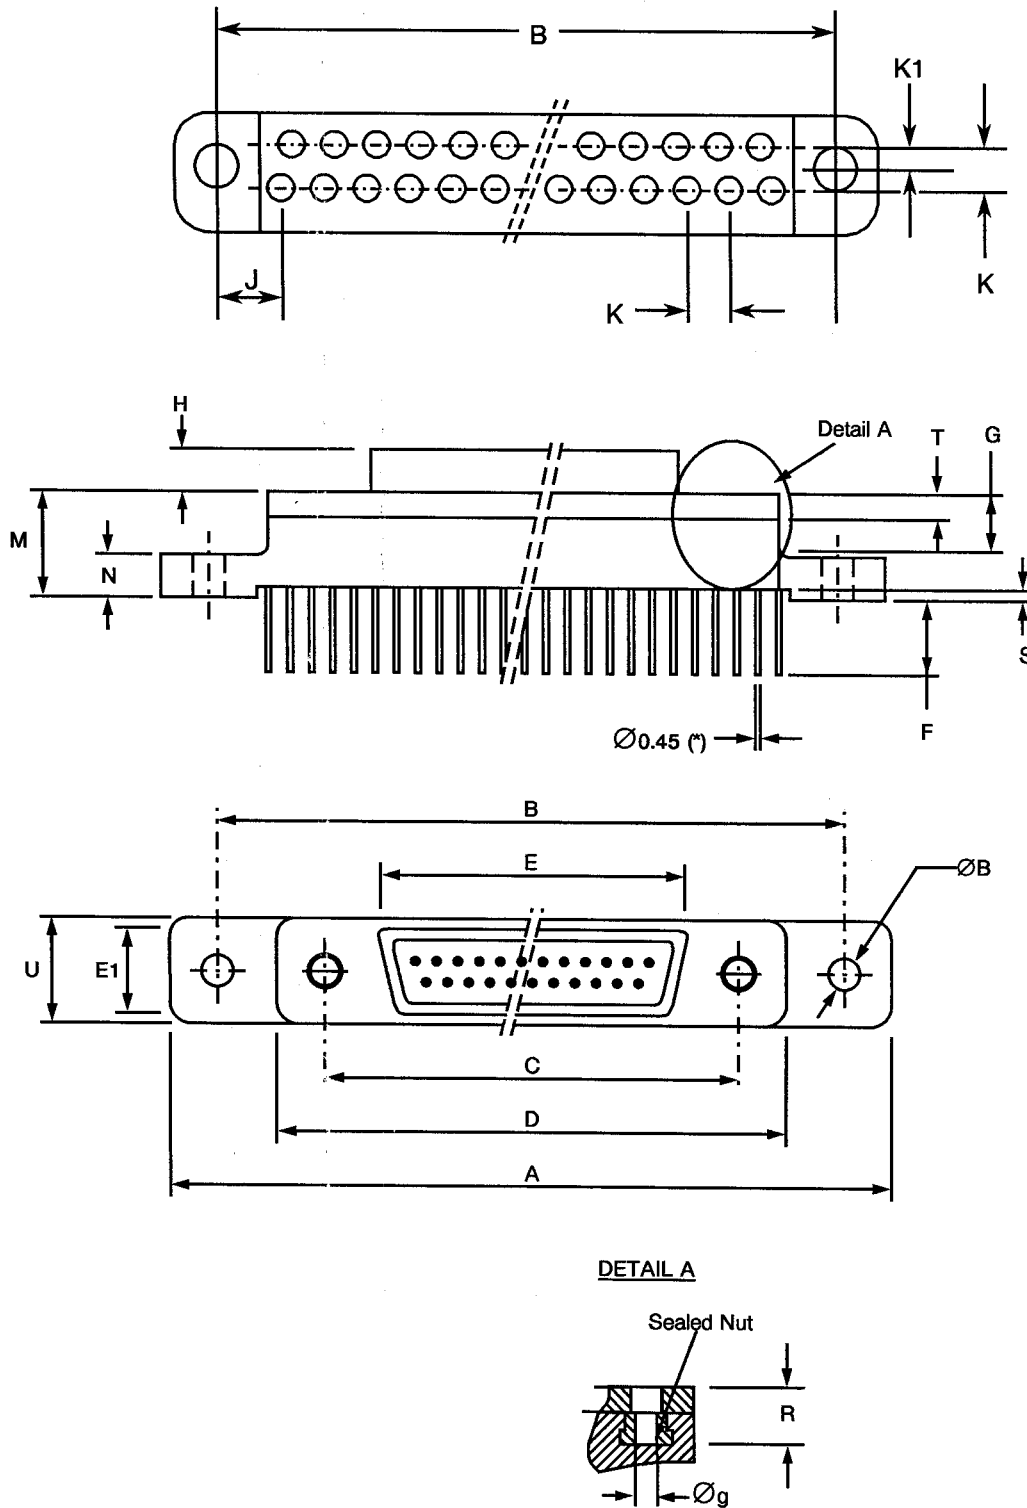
PHYSICAL DIMENSIONS (CONTINUED)
